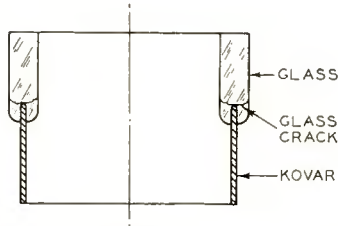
Butt seal made to a Kovar cylinder two inches in diameter.
